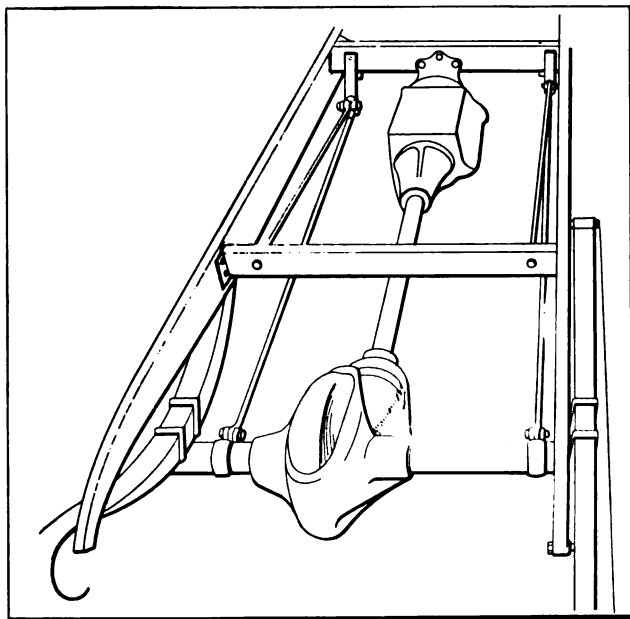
Simple torque rods that can be fitted to cars that are built without any
